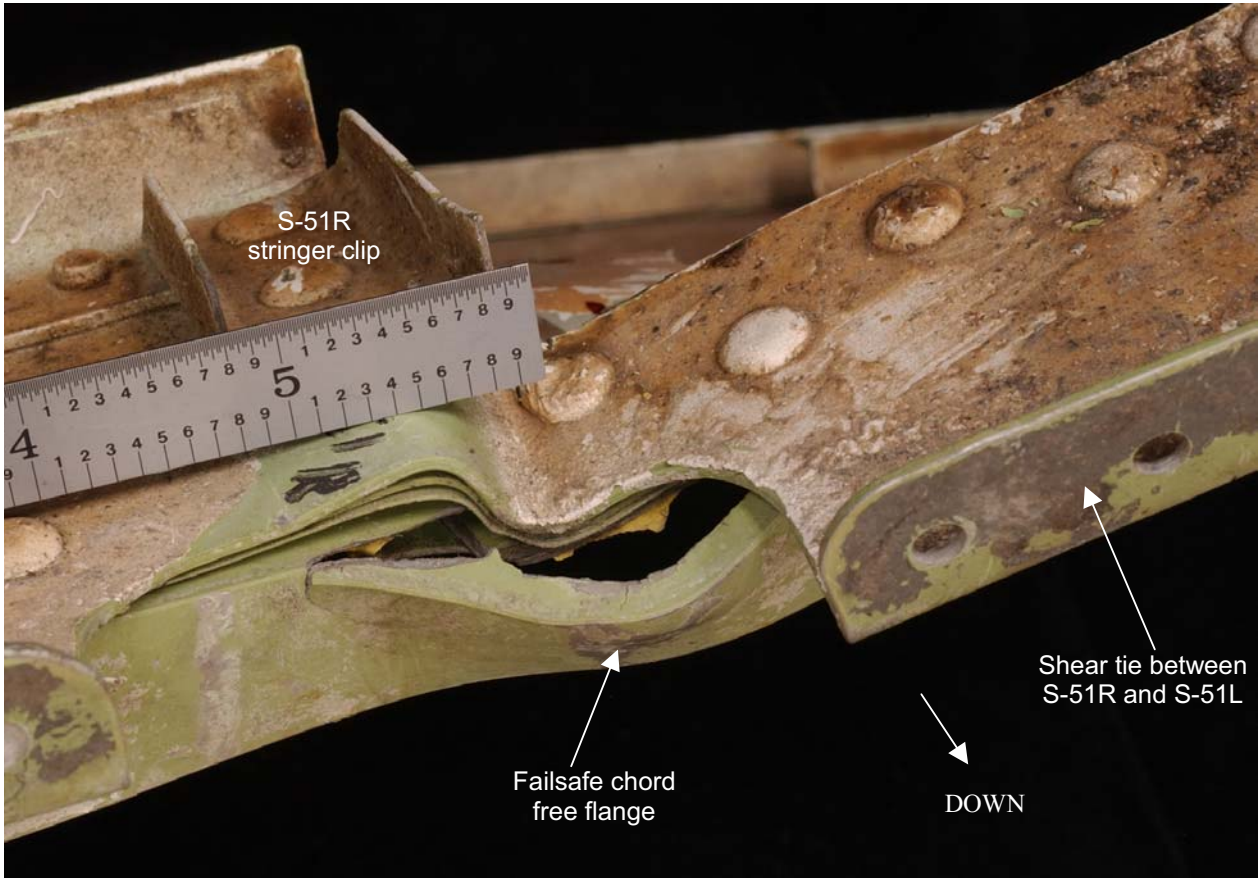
Fracture in failsafe chord free flange radius at S-51R of the STA 2040 frame segment.
